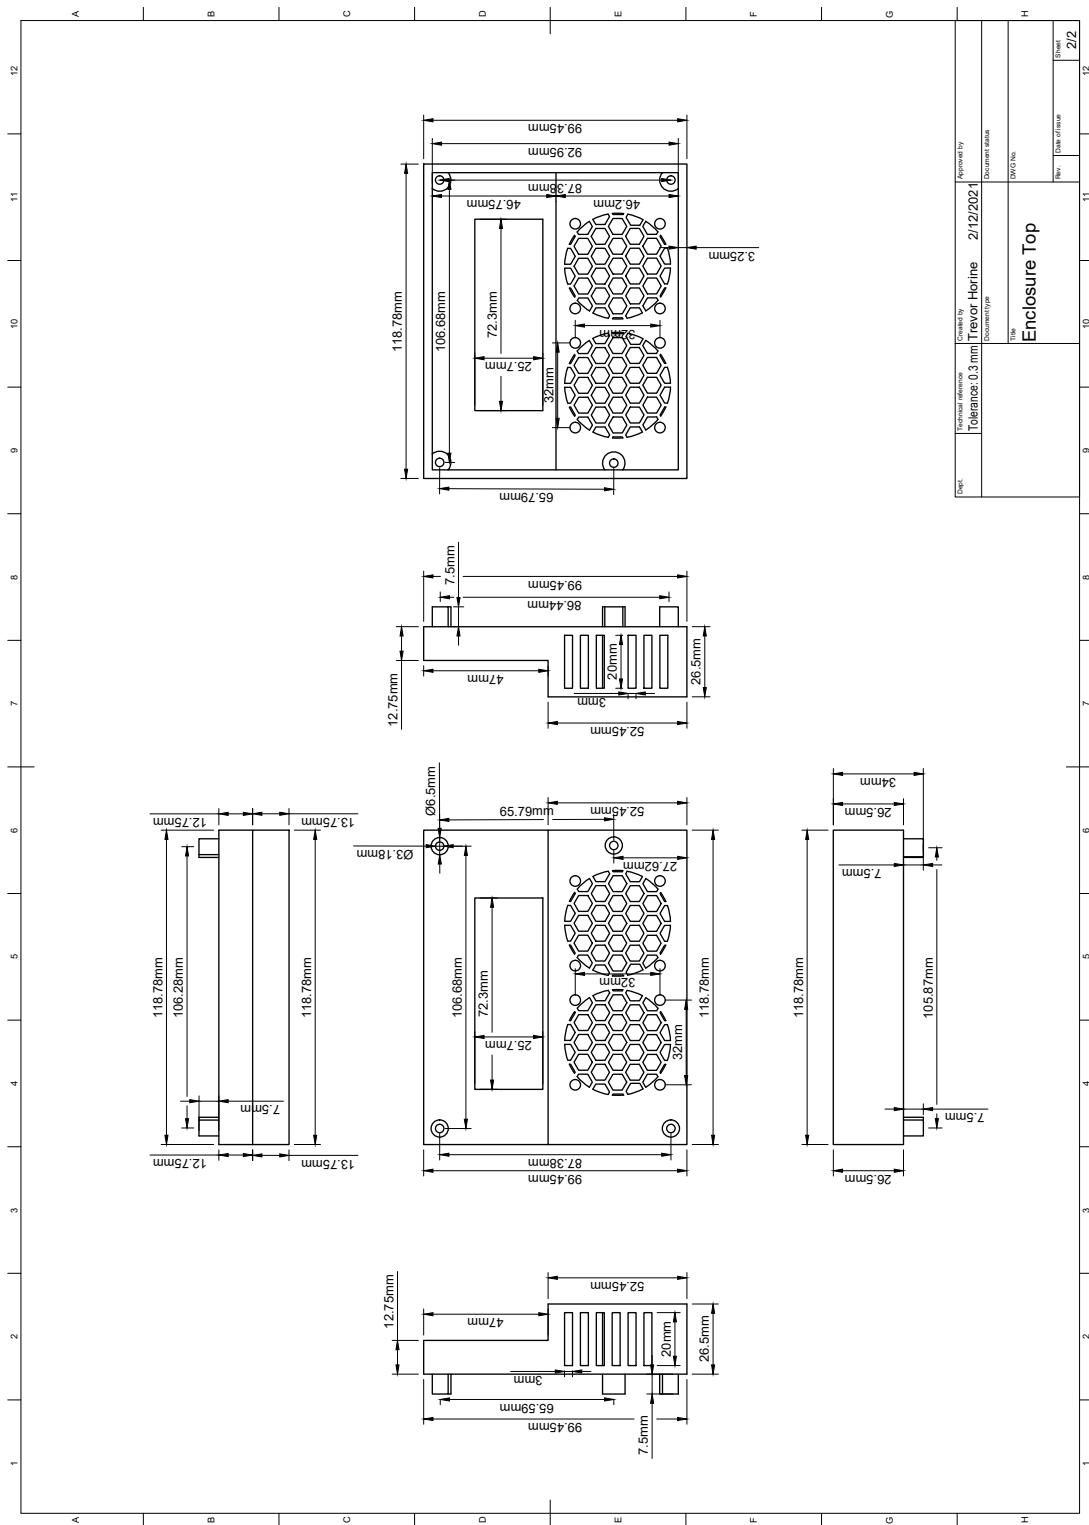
Mechanical drawing of the top half of the enclosure designed to hold the PCB.
